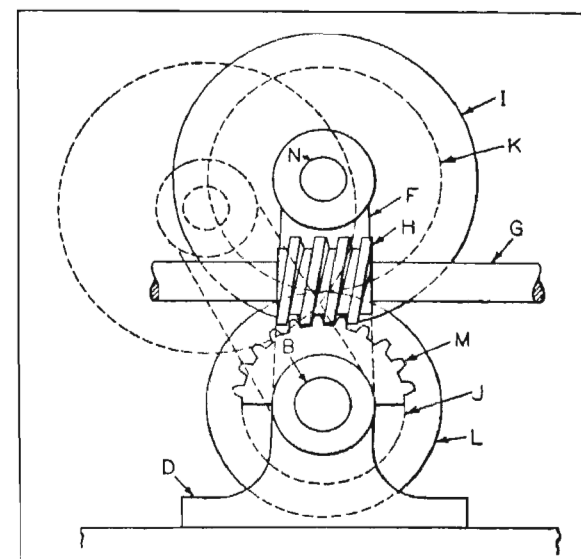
End View of Timing Mechanism Illustrated in Fig. 4
